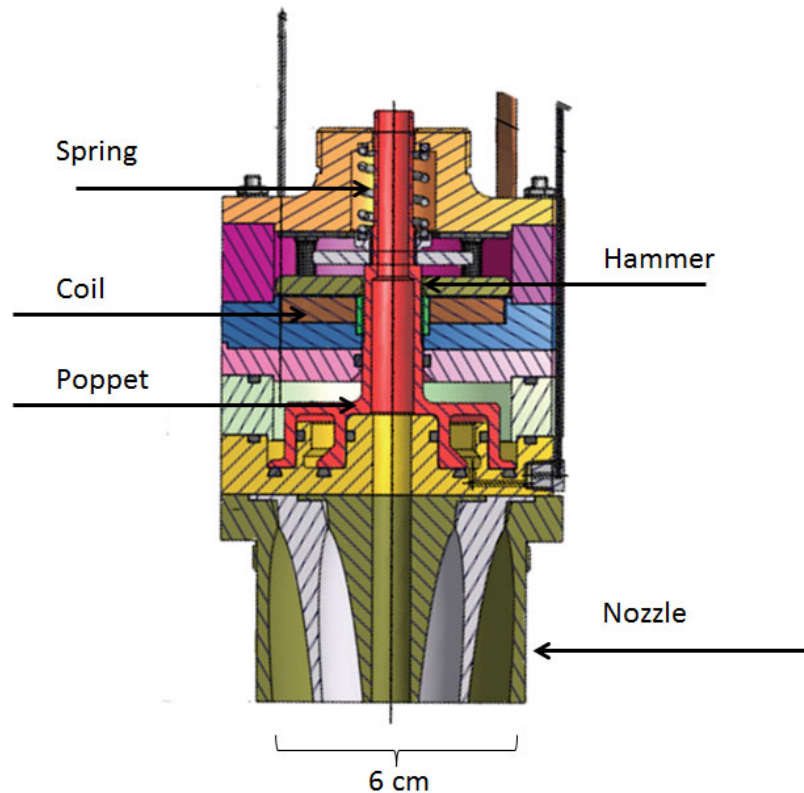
Mechanical drawing of puff valve. Key components are labeled.
